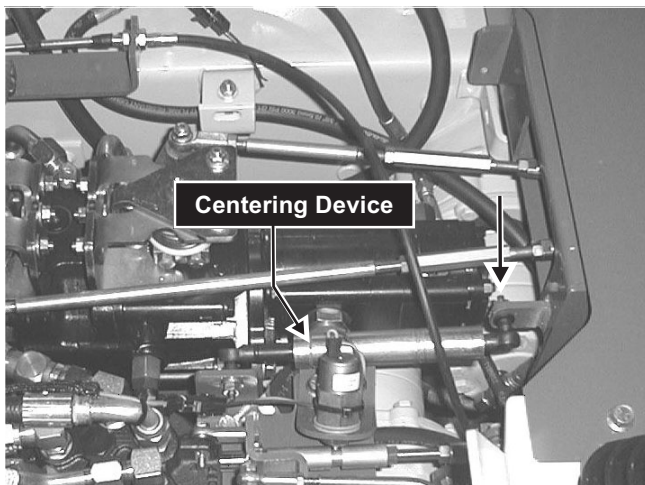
Location to disconnect centering device on dual control weldment.
